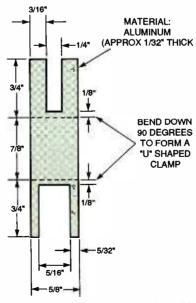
The coupler retaining clip holds the universal-shaft-coupler components together. One clip is required for each motor/rod assembly.
